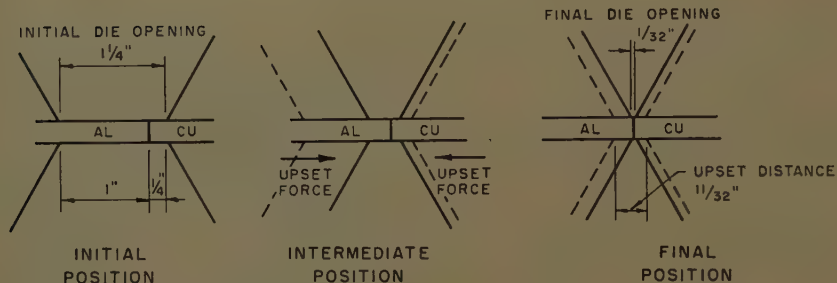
Conditions used in flash welding 1/4-inch by 1 1/2-inch bars
